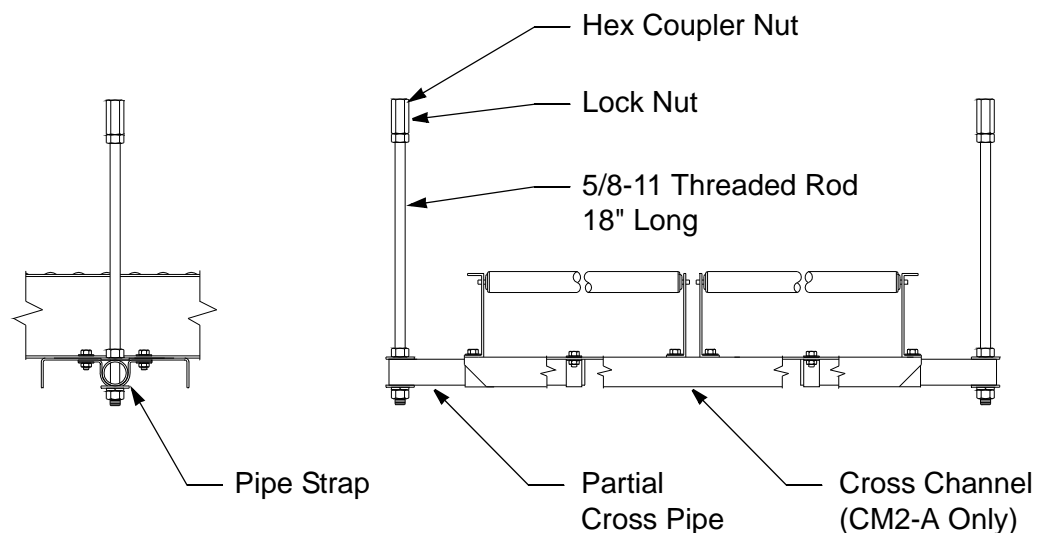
CM2-A & CM2-B Ceiling Hangers
